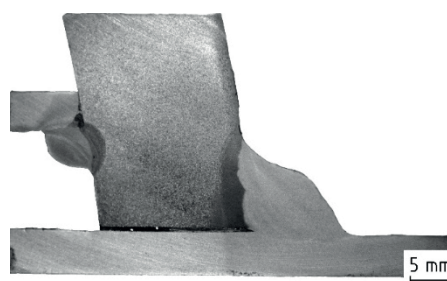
Macrograph of fillet weld joint between sphere-like part of the sleeve and pipe
